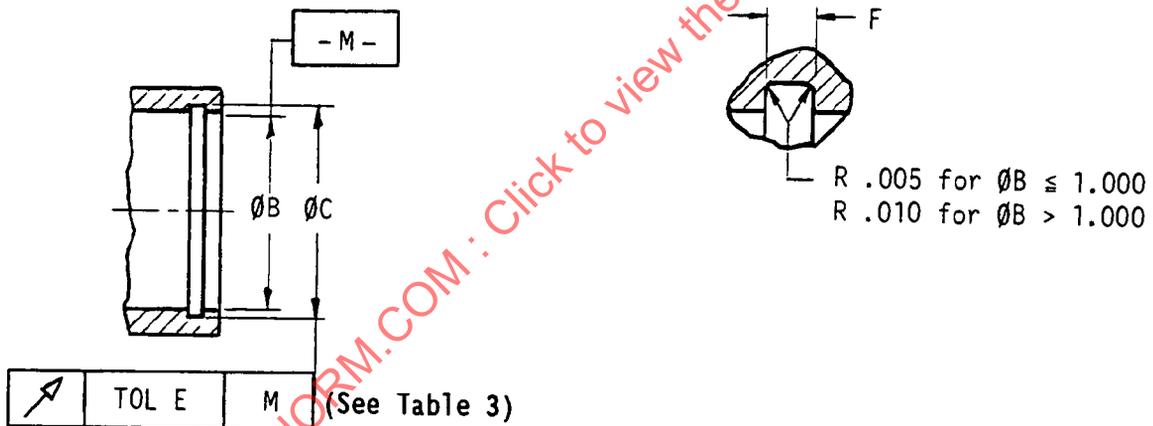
Groove Dimensions, Type II, Classes 1 and 2 Retaining Rings (See Table 5)
